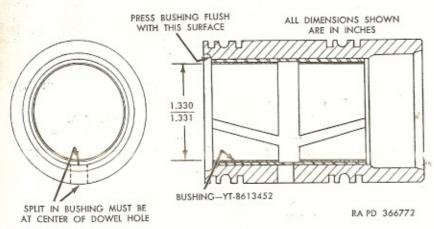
Sectional view of front clutch oil delivery sleeve assembly.
